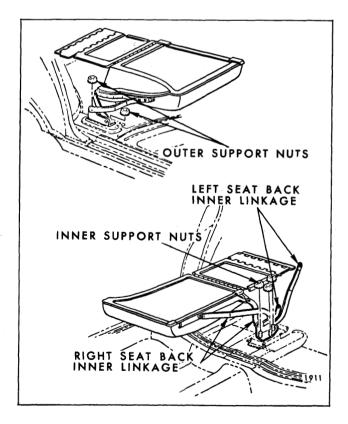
Folding Second Seat Back Supports and Linkages (Split Seat)
